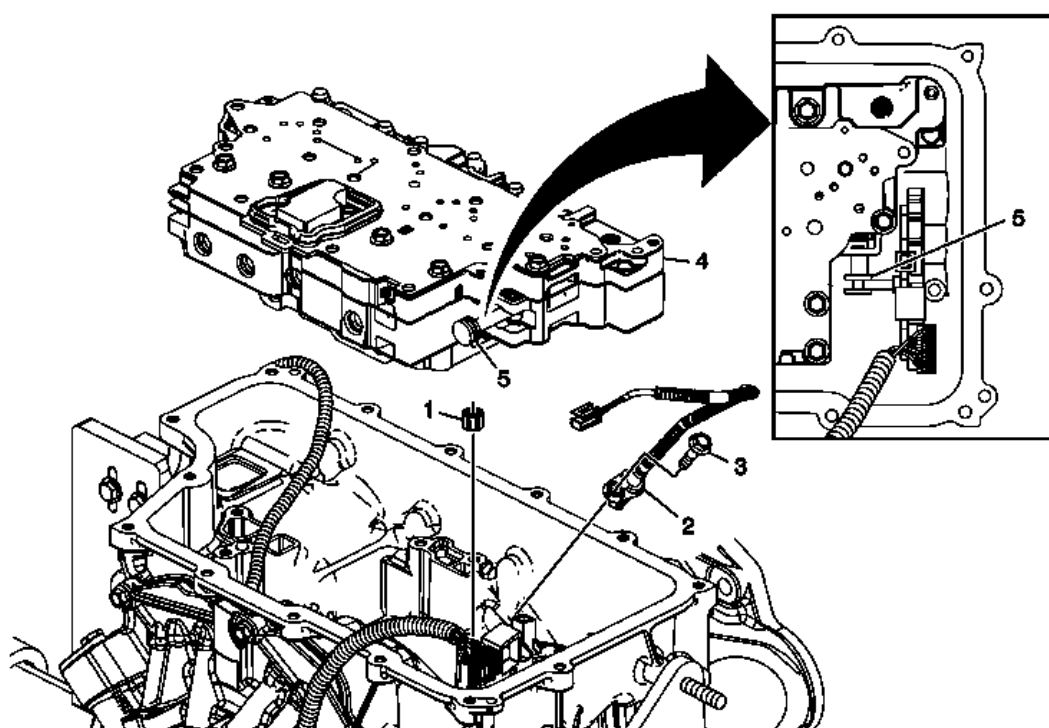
Output Speed Sensor And Control Valve Body Assembly
